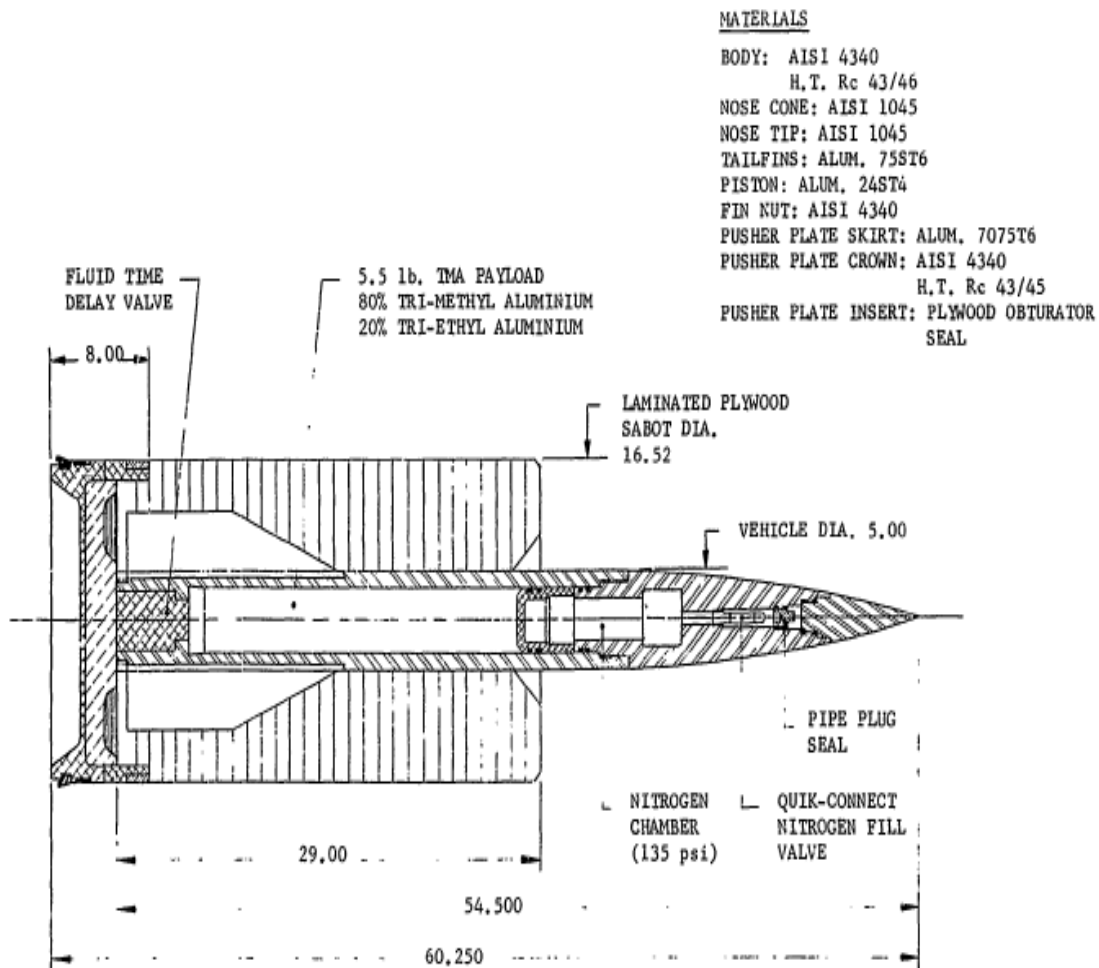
Drawing of the Martlet 2C (Mod 2) [11]
